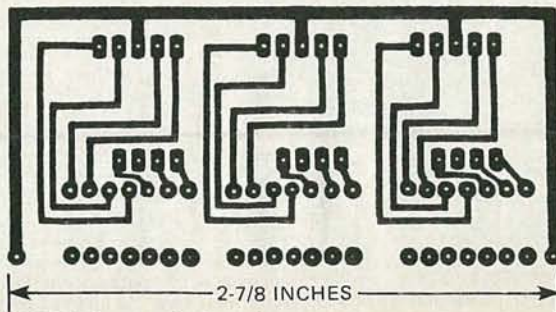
DISPLAY BOARD foil pattern is shown here.
